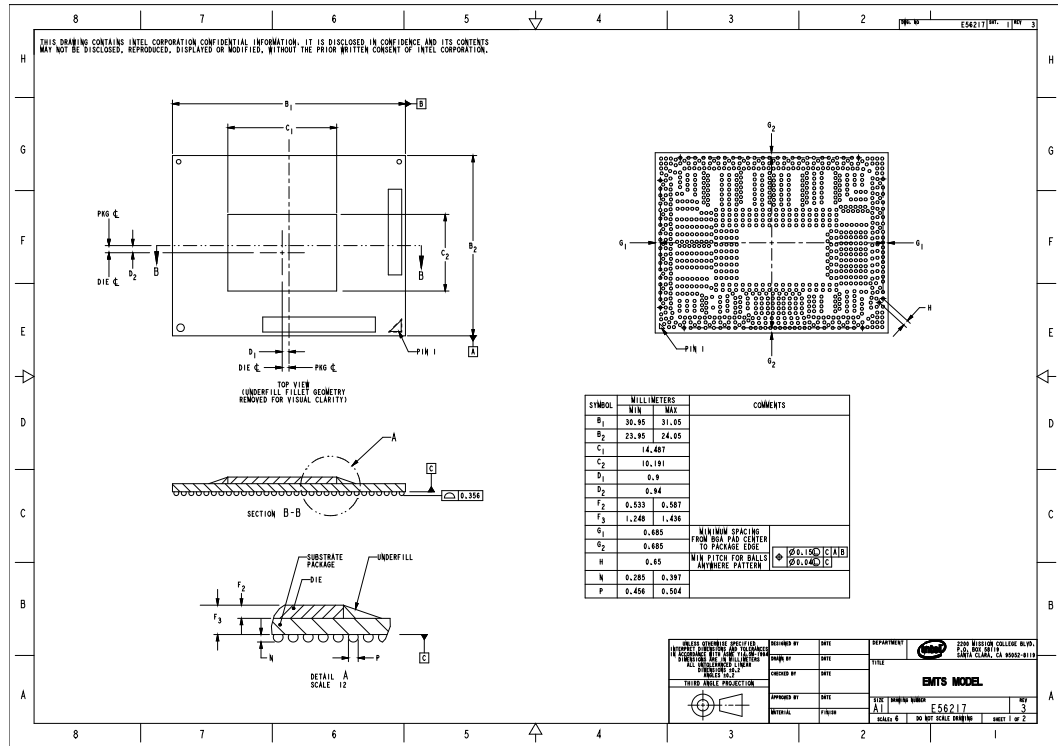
Sandy Bridge- Mbl BGA Two-Core-Die 1023 Ball Package Mechanical Drawing
